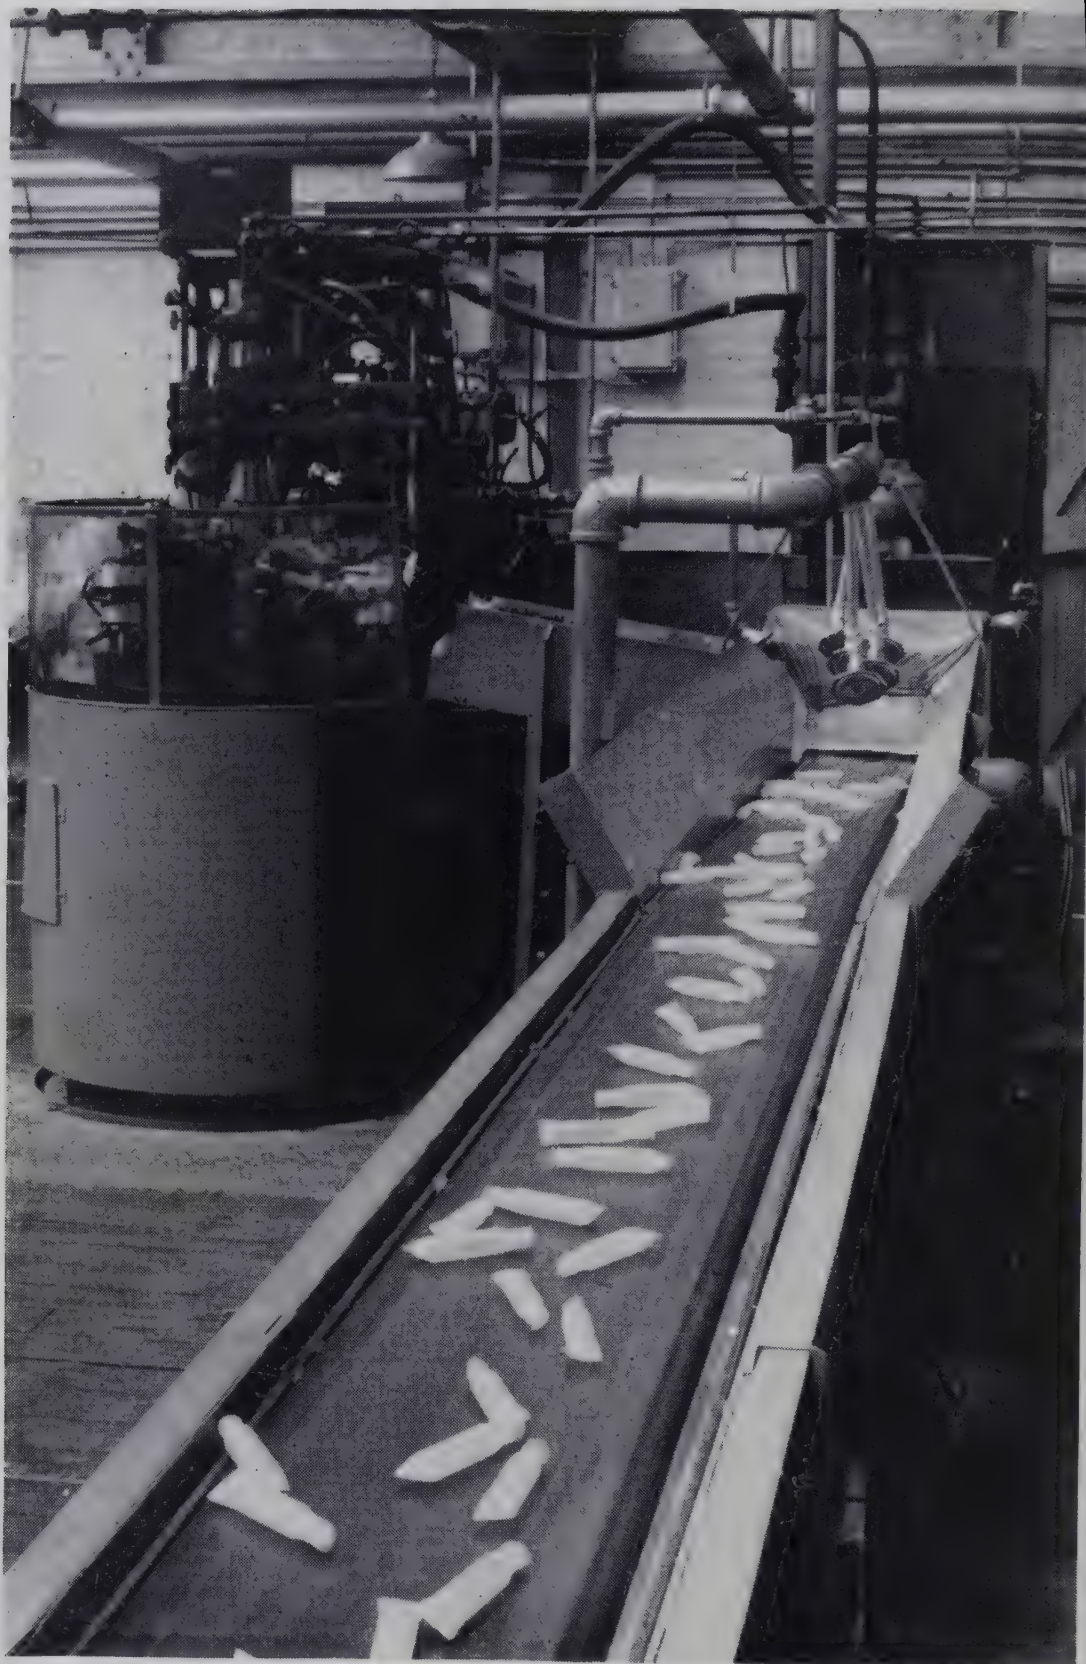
Bottles from machine shown in Plate 22.3 fall onto conveyor where they are cooled by water spray
